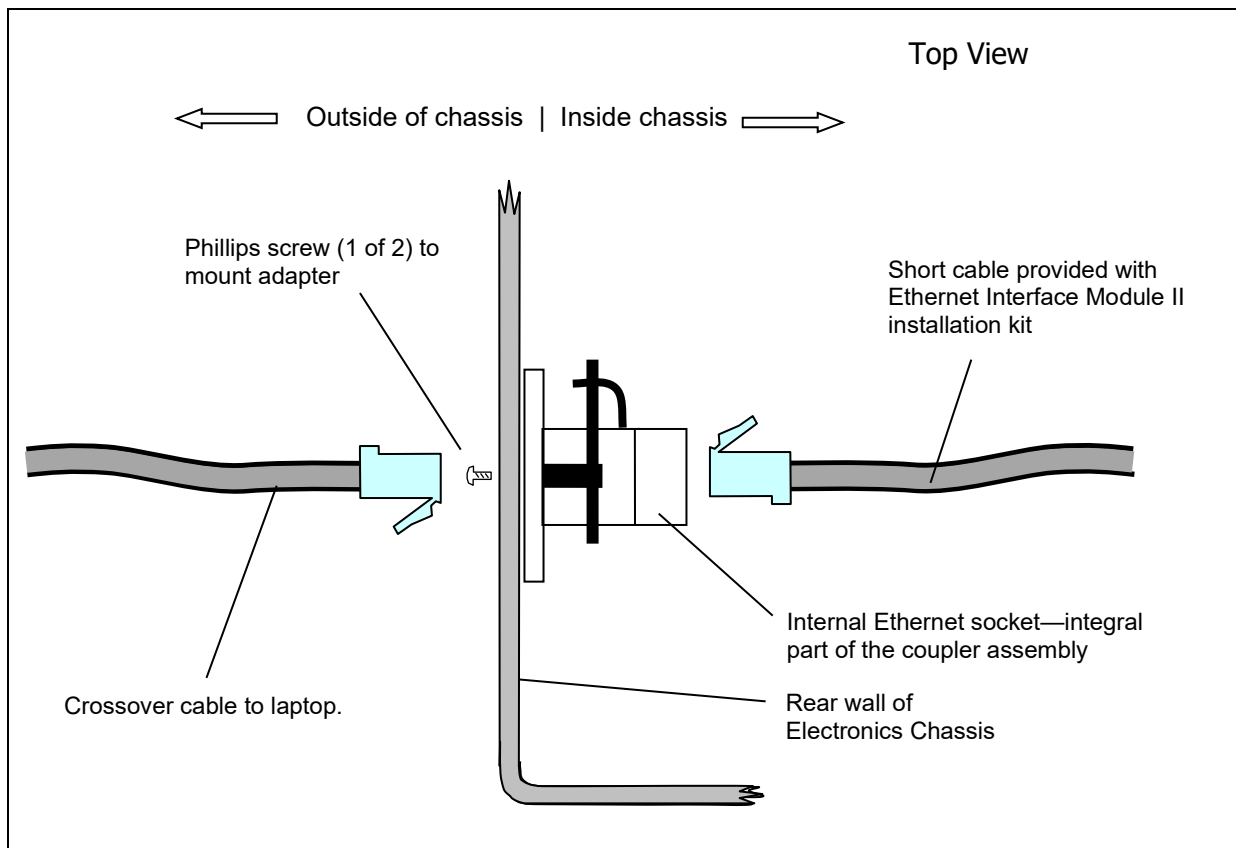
Top view of Ethernet cable adapter installation. The shorter cable on the right is permanent and remains in place after the adapter installation is complete.
